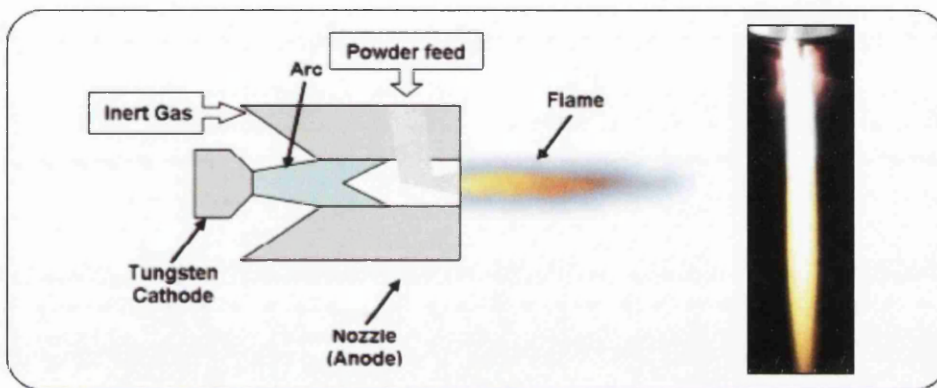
Cross-sectional view of an APS gun and a photograph an APS flame
